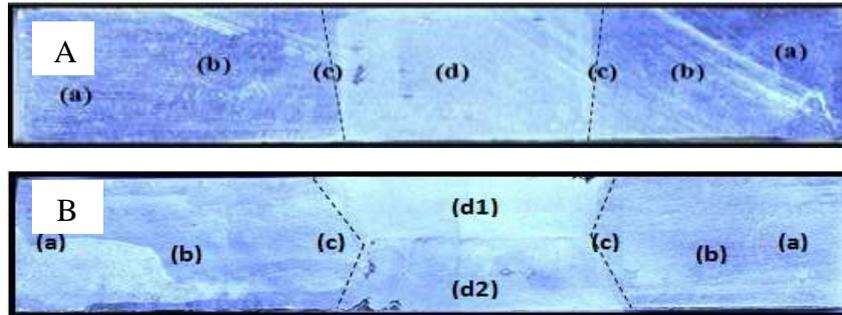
(a) Cross-section of FSW welded joints for Group A and (b) cross-section of FSW welded joints for Group B.
